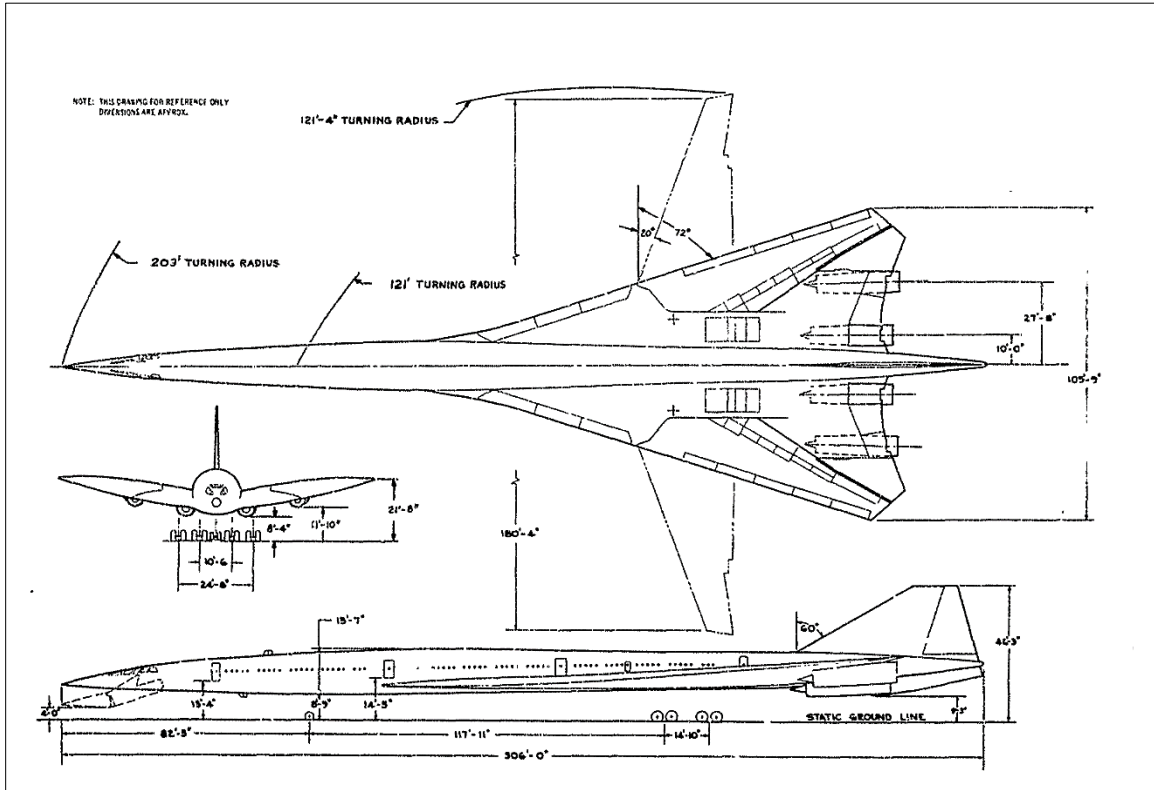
Geometric Dimensional Representation of Boeing B2707-100 SST
